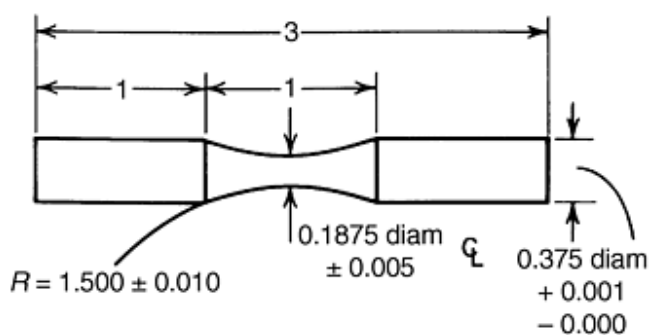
Dimensions (in inches) of rotating-bending fatigue (RBF) test specimens
